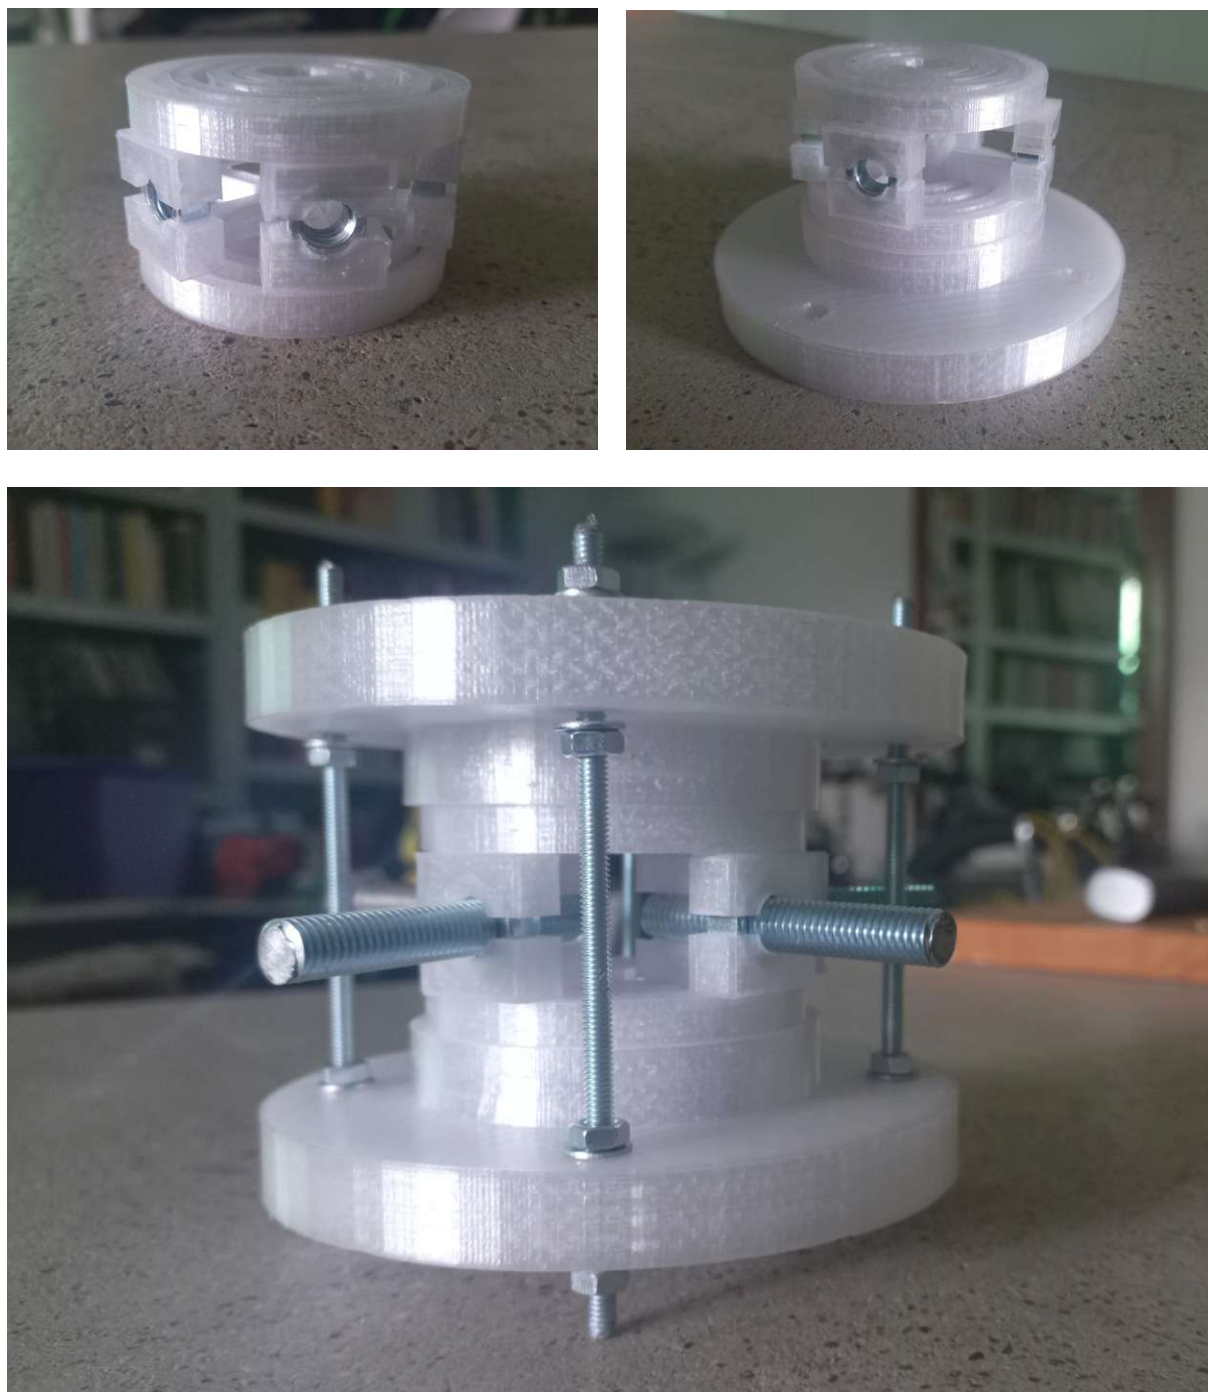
Node connector A, 3d printed prototype, interior parts and fully assembled component.
